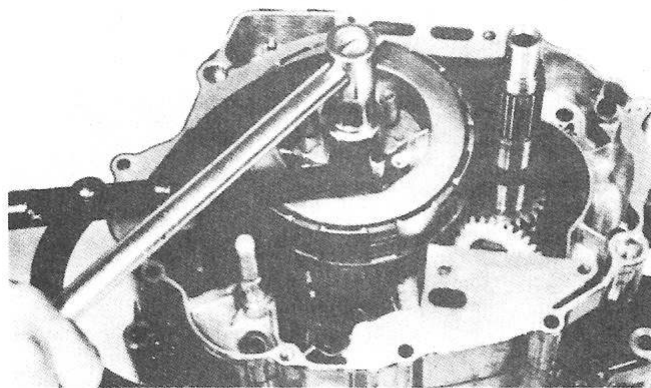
B.27 Removing the clutch hub retaining nut (Sec 13)
